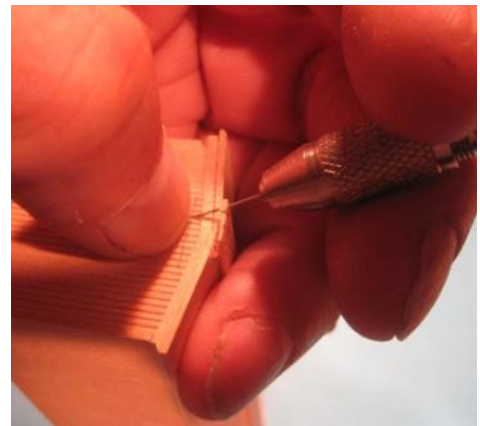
Use a thumb to keep the drill bit from wandering away from the guide hole.
